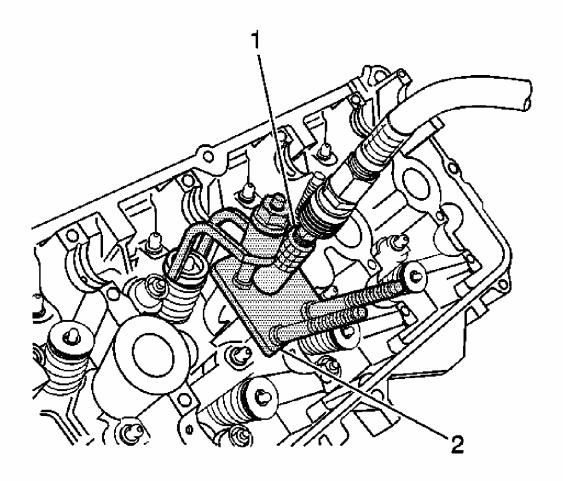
View Of Base Plate Installed Over The Spark Plug Hole For Changing Valve Stem Seal Courtesy of GENERAL MOTORS CORP.
